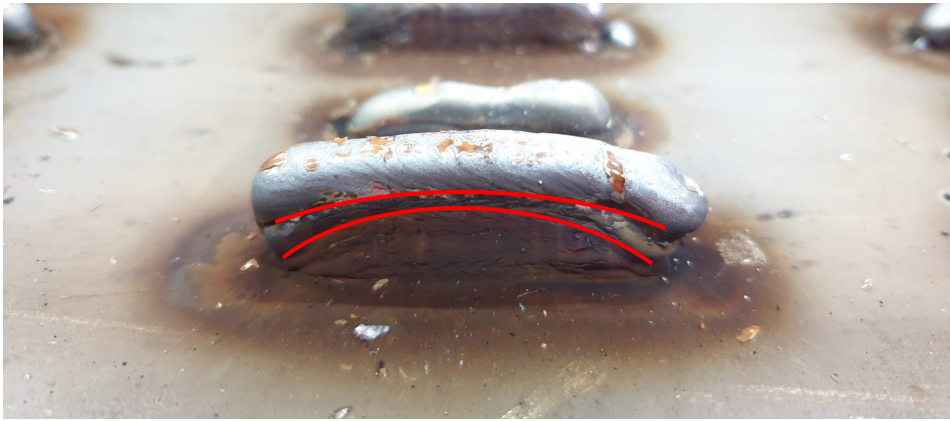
The welding material slowly slides off the edge of the weld
